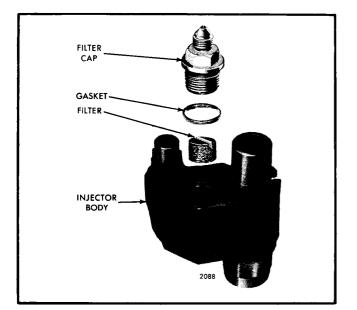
Details of Injector Filters and Caps and Their Relative Location
